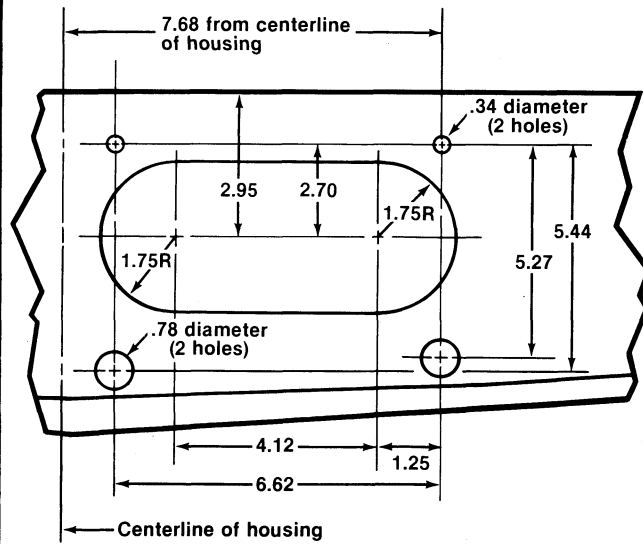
Location of Holes for Front Housing — 4 Wheel
